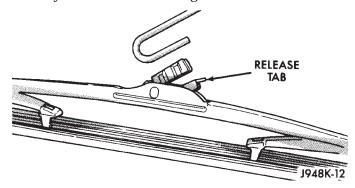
Front or Rear Wiper Blade Remove/Install - Typical
